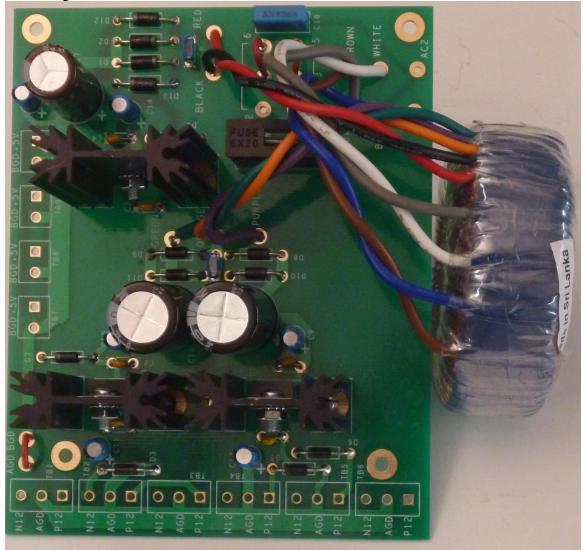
Transformer and power supply assembly ready for installation Prepare the transformer wires for connection to the power supply PCB as follows,
